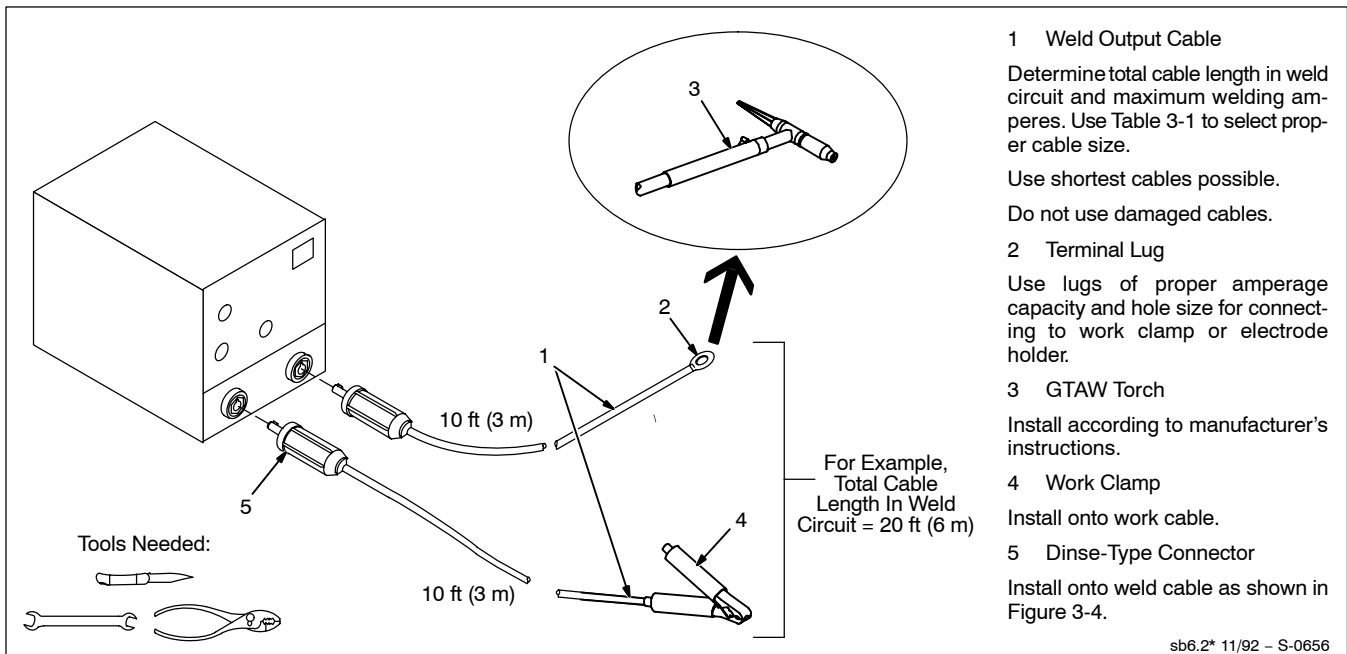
Selecting And Preparing Weld Output Cables
